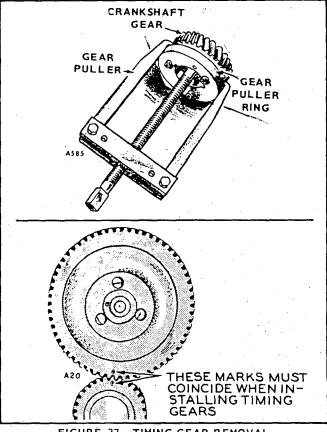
TIMING GEAR REMOVAL AND INSTALLATION
